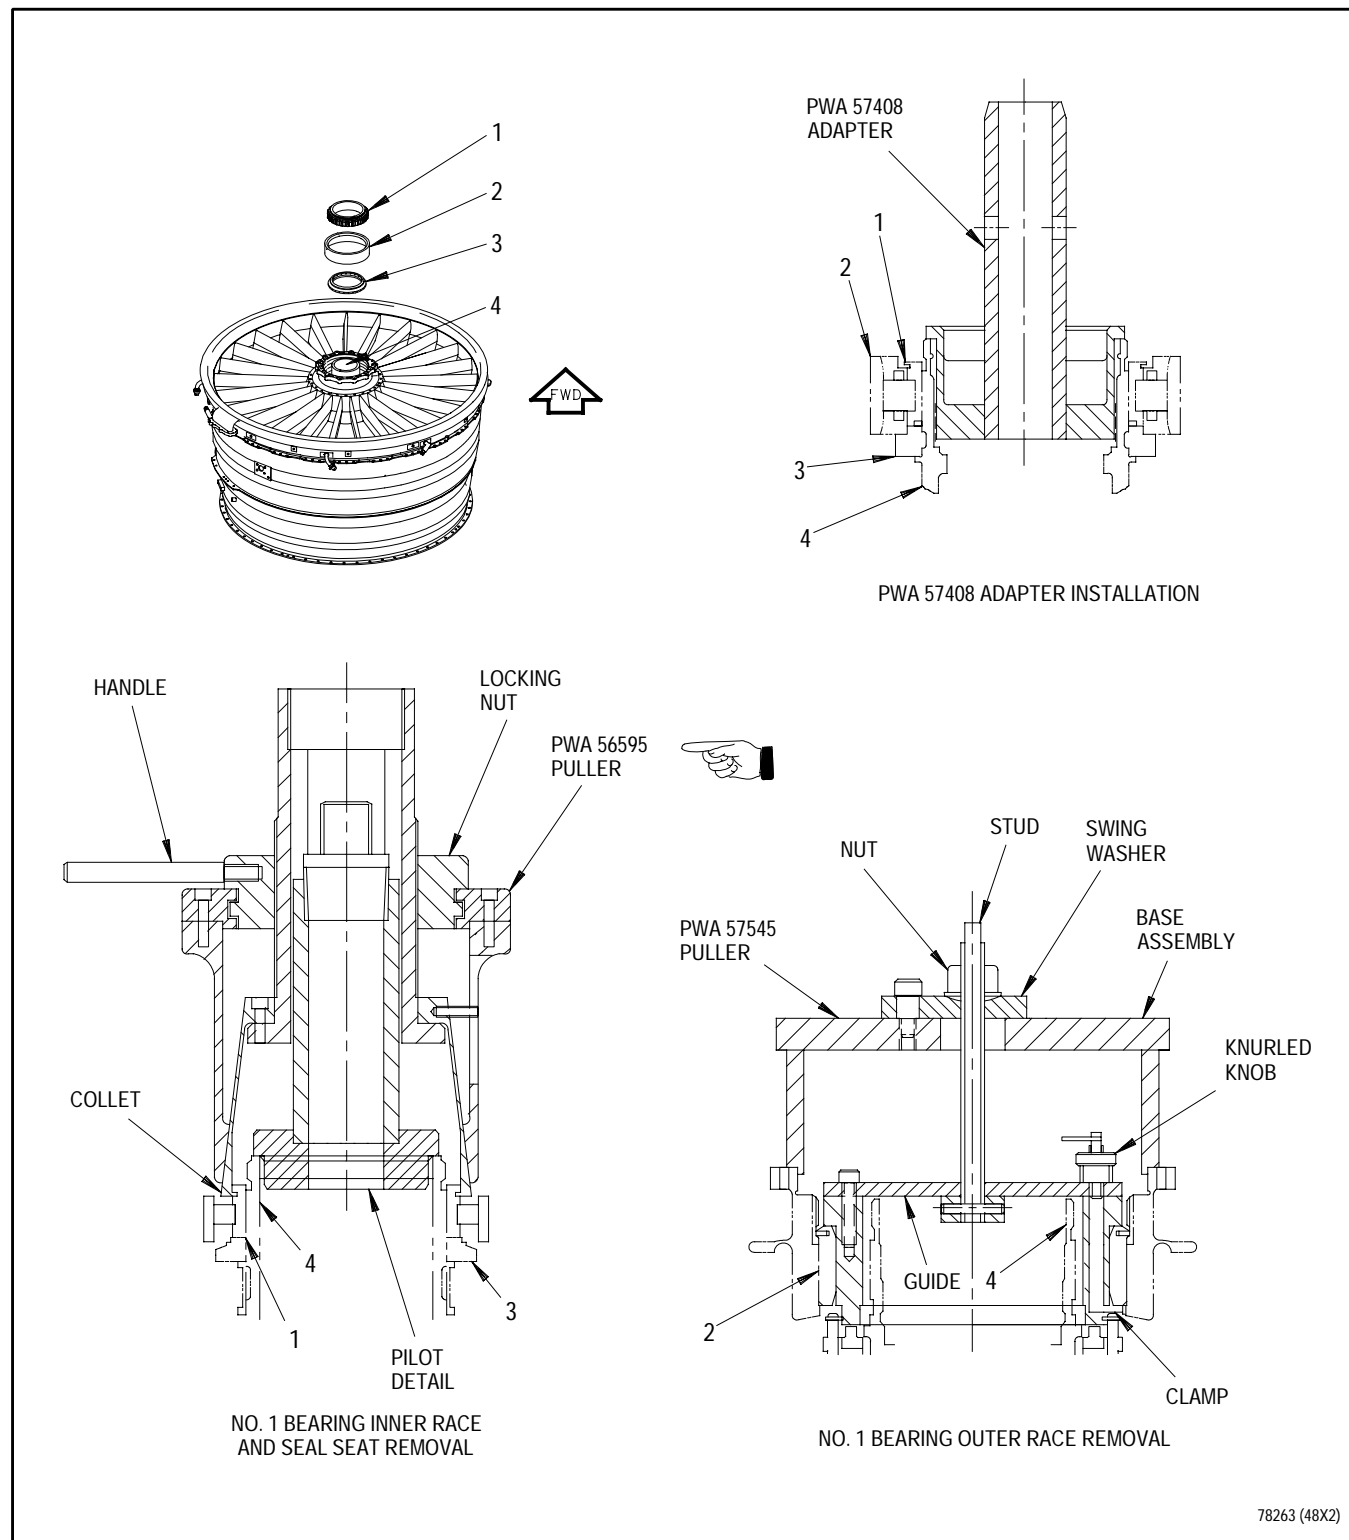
No. 1 Bearing and No. 1 Bearing Seal Seat - Removal
